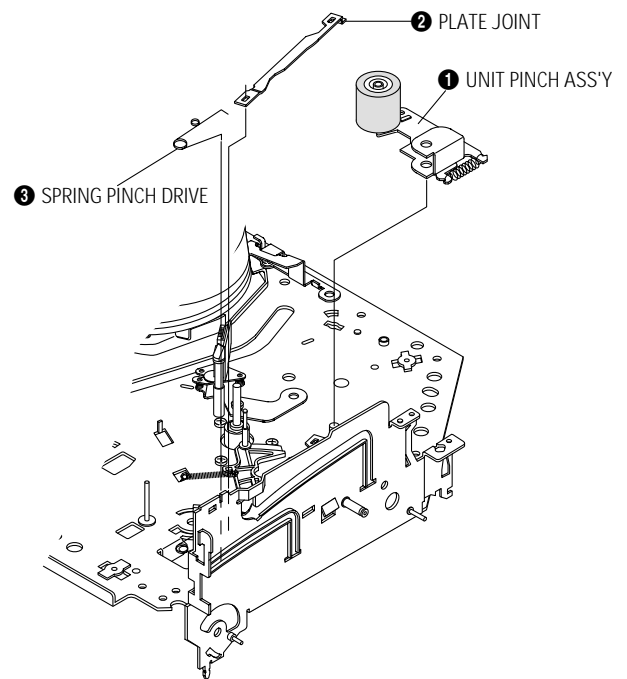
Unit Pinch Ass'y, Plate Joint, Spring Pinch Drive Removal
